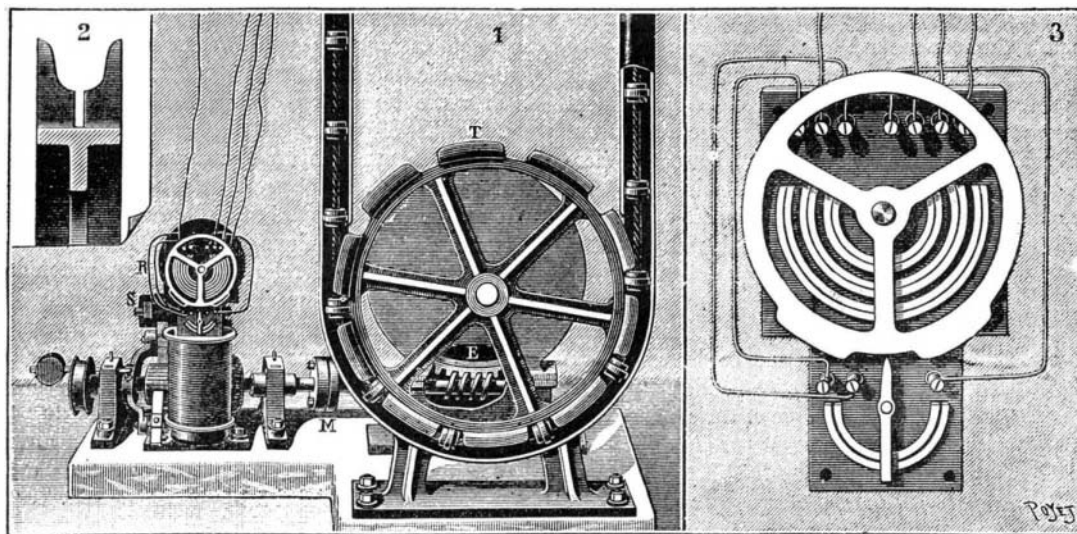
DETAILS OF AN ELECTRIC WINDLASS FOR AN ELEVATOR.
